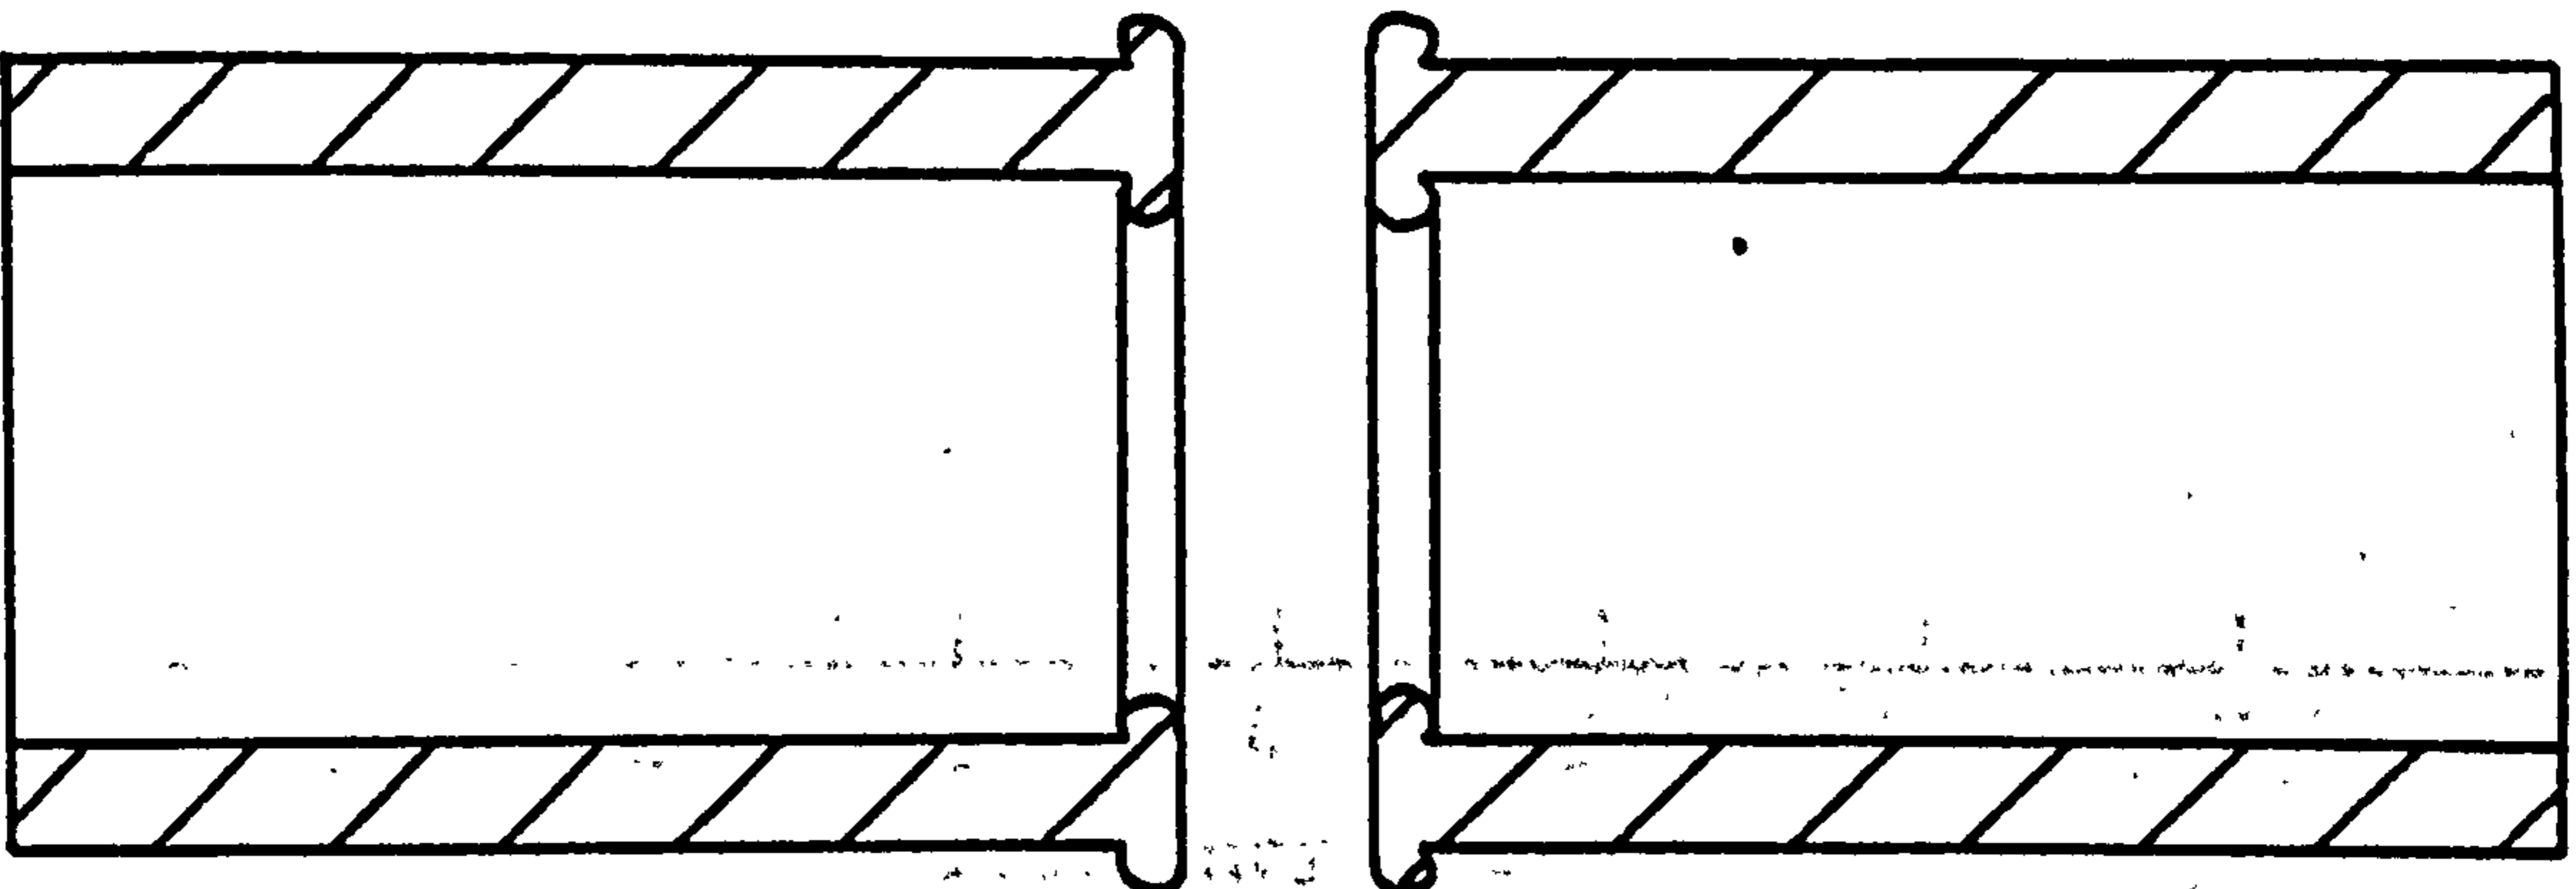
Schematic representation of observed brittle fractures in 60 and 63mm OD SDR 11 butt-welded PE pipes.
